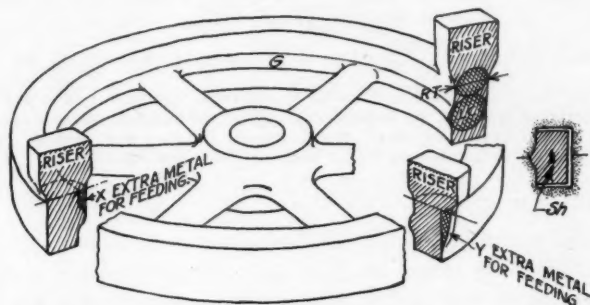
METHOD FOR SECURING SOUNDNESS IN GEAR BLANK RIM.
